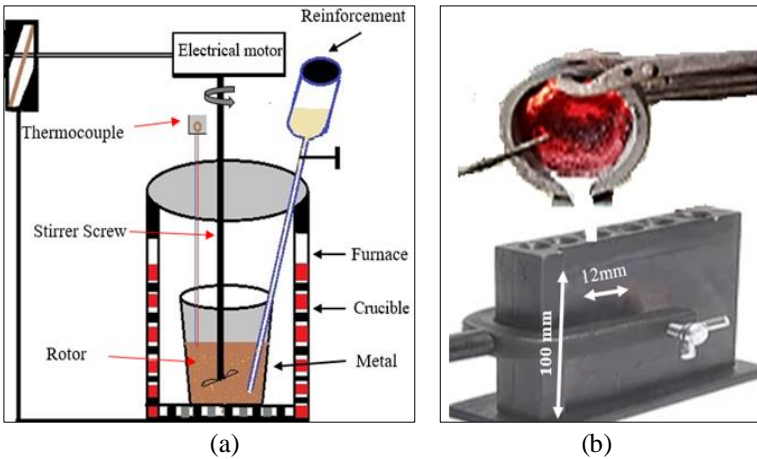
(a) The stir casting furnace for melting, and (b) the casting mould
